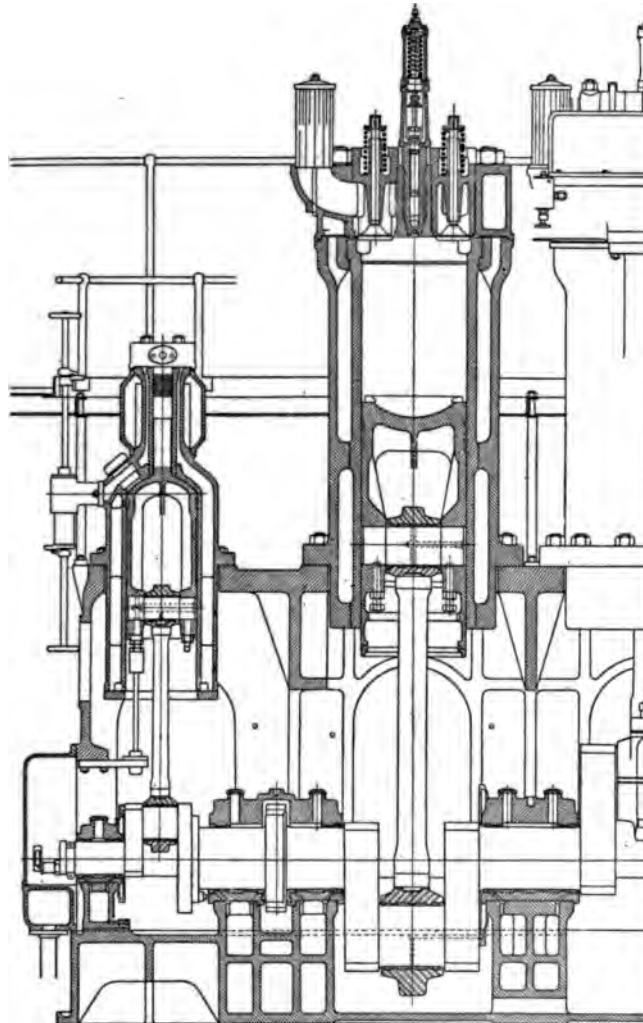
SECTION OF McINTOSH AND SEYMOUR OIL ENGINE
